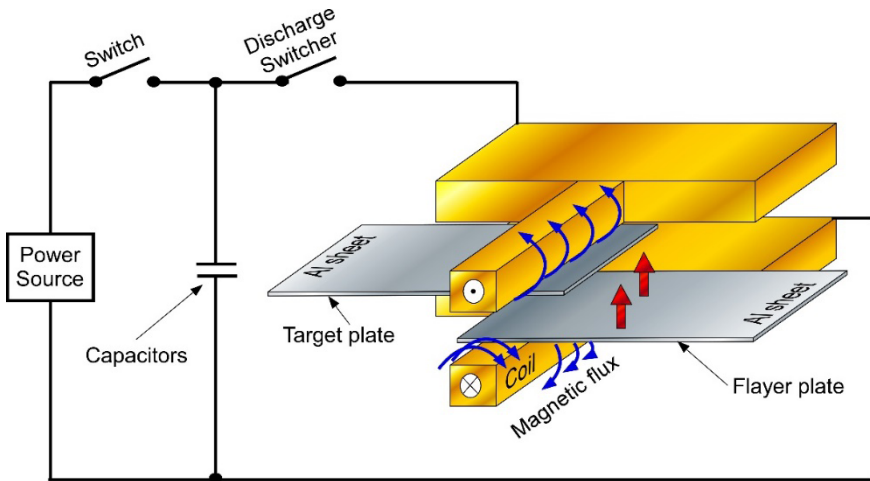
Schematic explanation of magnetic pulse welding.
